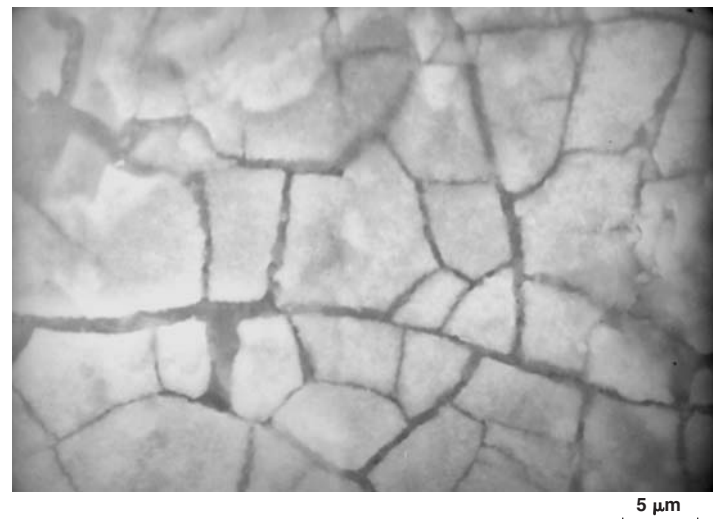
Fracture surface of bolt No. 2 showing mud cracks
